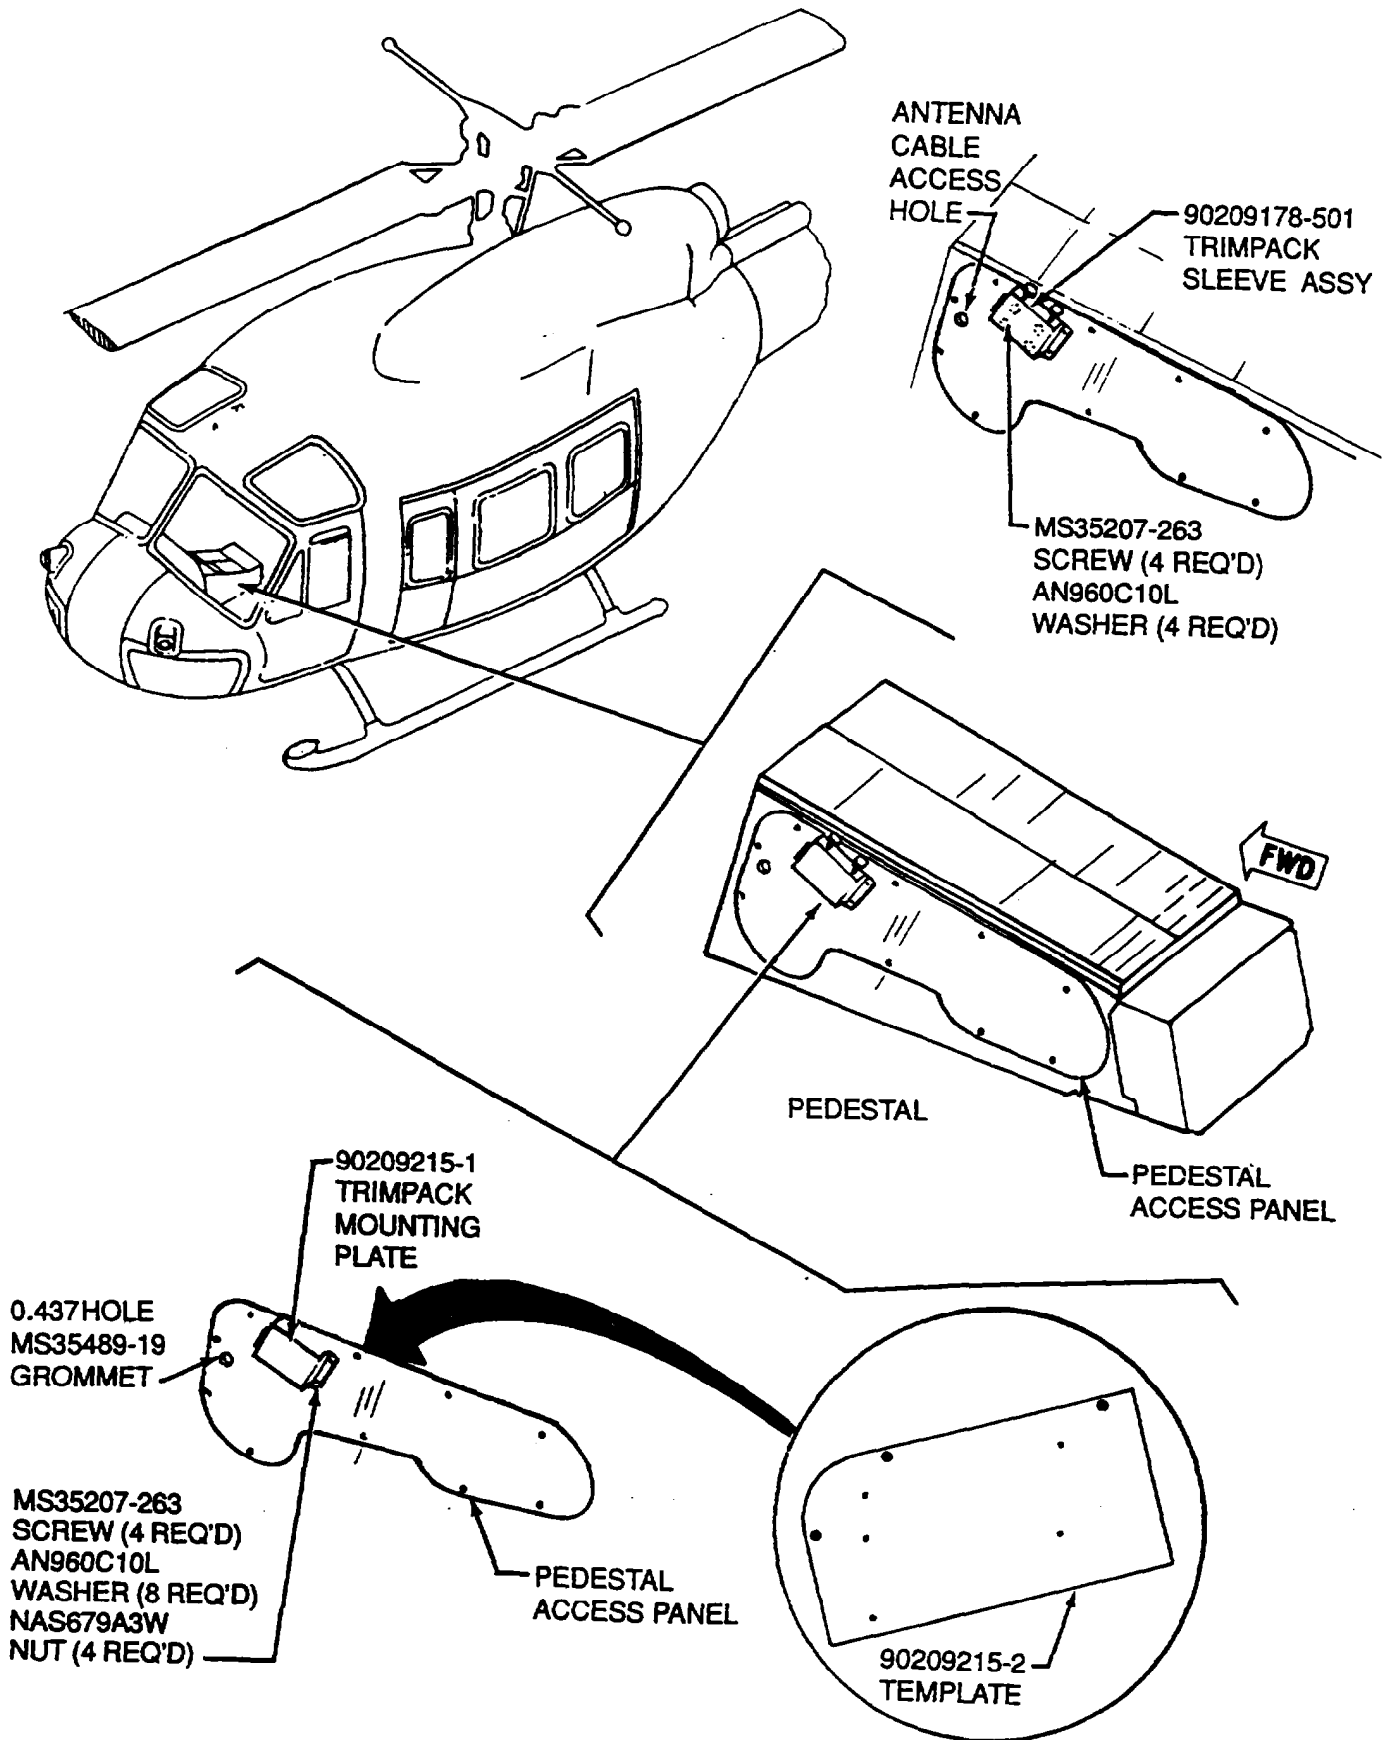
Trimpack Mount and Sleeve Assembly Installation.
